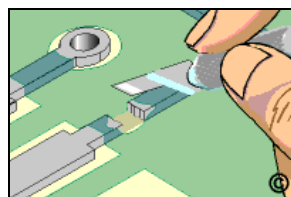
Make two small cuts with a Knife and remove a short section of circuit.
